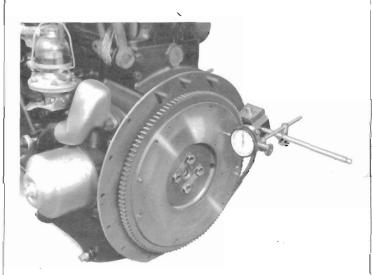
Measuring flywheel face run-out with a magnetic base dial gauge
